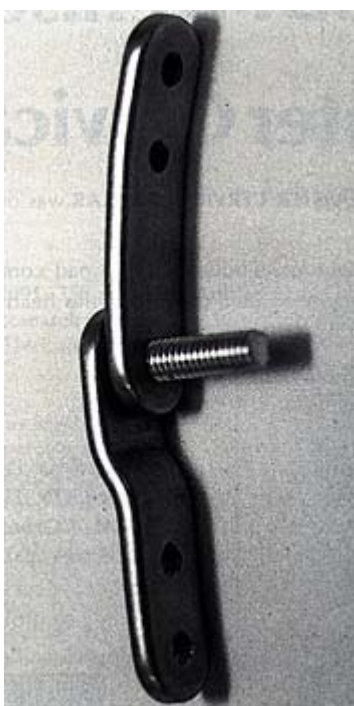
Replacing the manufacturer's axis with a longer machine screw will adapt a variety of commercial joints for alignment with this technique.
